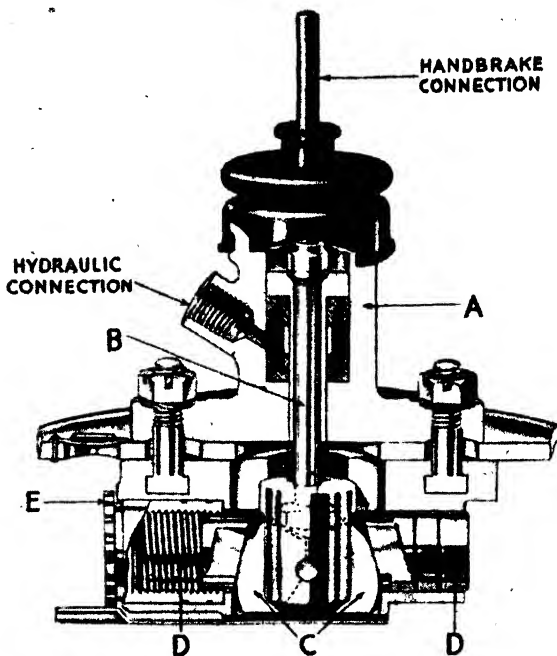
THE LOCKHEED "BISECTOR EXPANDER"
